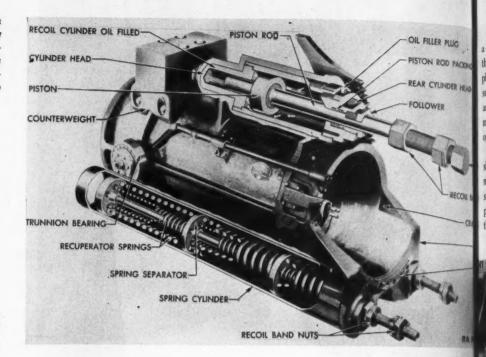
Below—Exploded perspective is a rendering of carbon pencil on tissue
